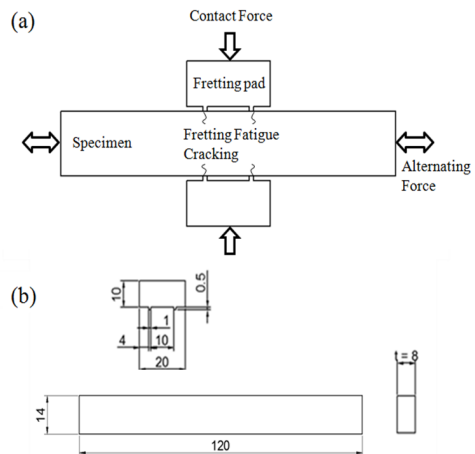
(a) Schematic of fretting fatigue test, and (b) geometry of the specimen and pad with dimensions
